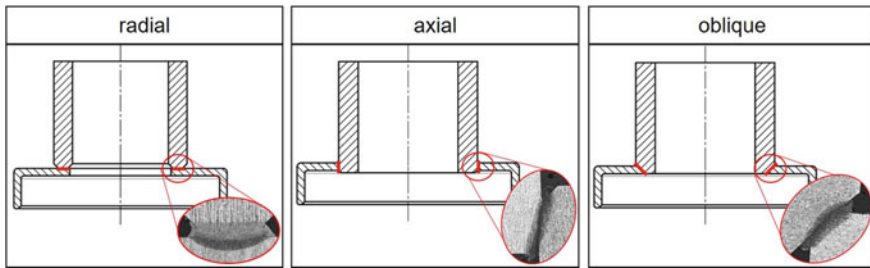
Sectional view of different weld arrangements to the axis of rotation of the joining partners, using the example of a hollow shaft-hub connection
